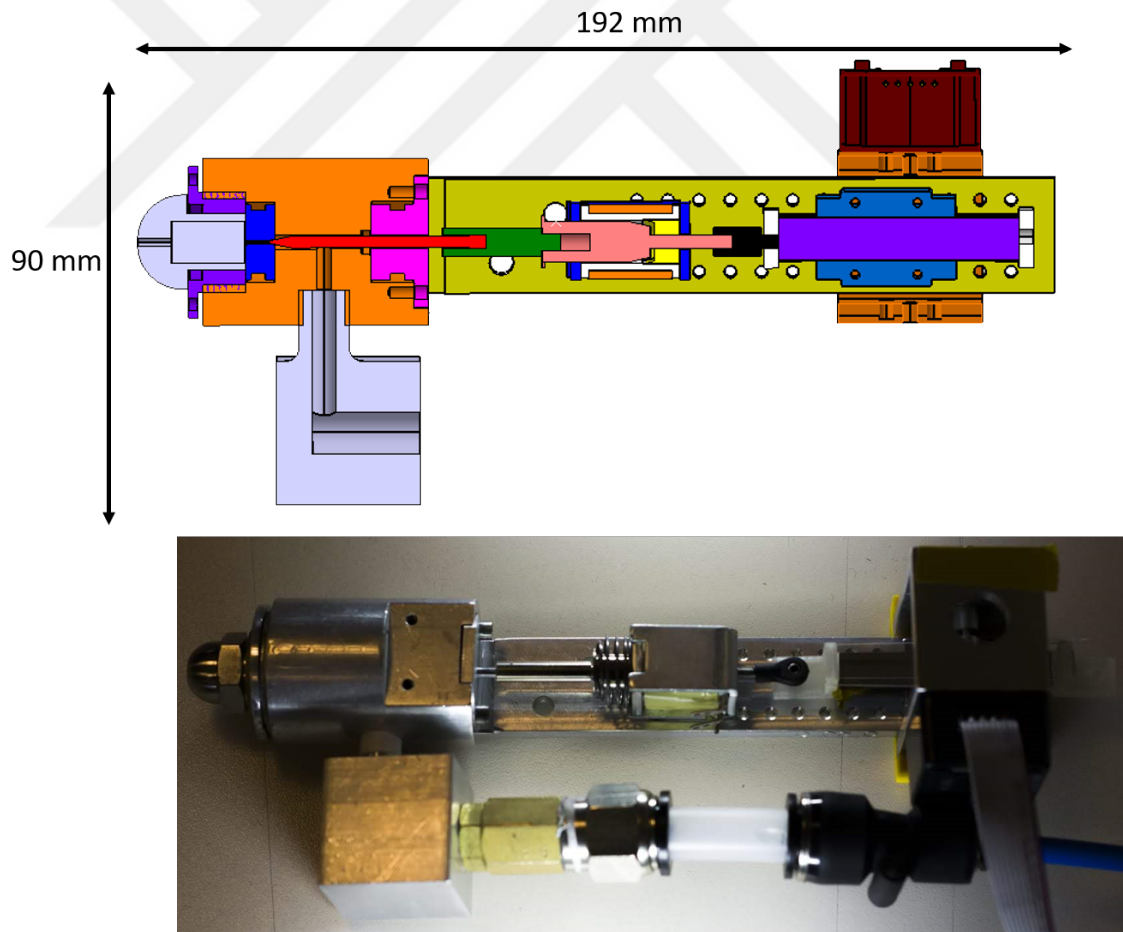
Top: CAD design of the injector and Bottom: Assembled pool type injector
